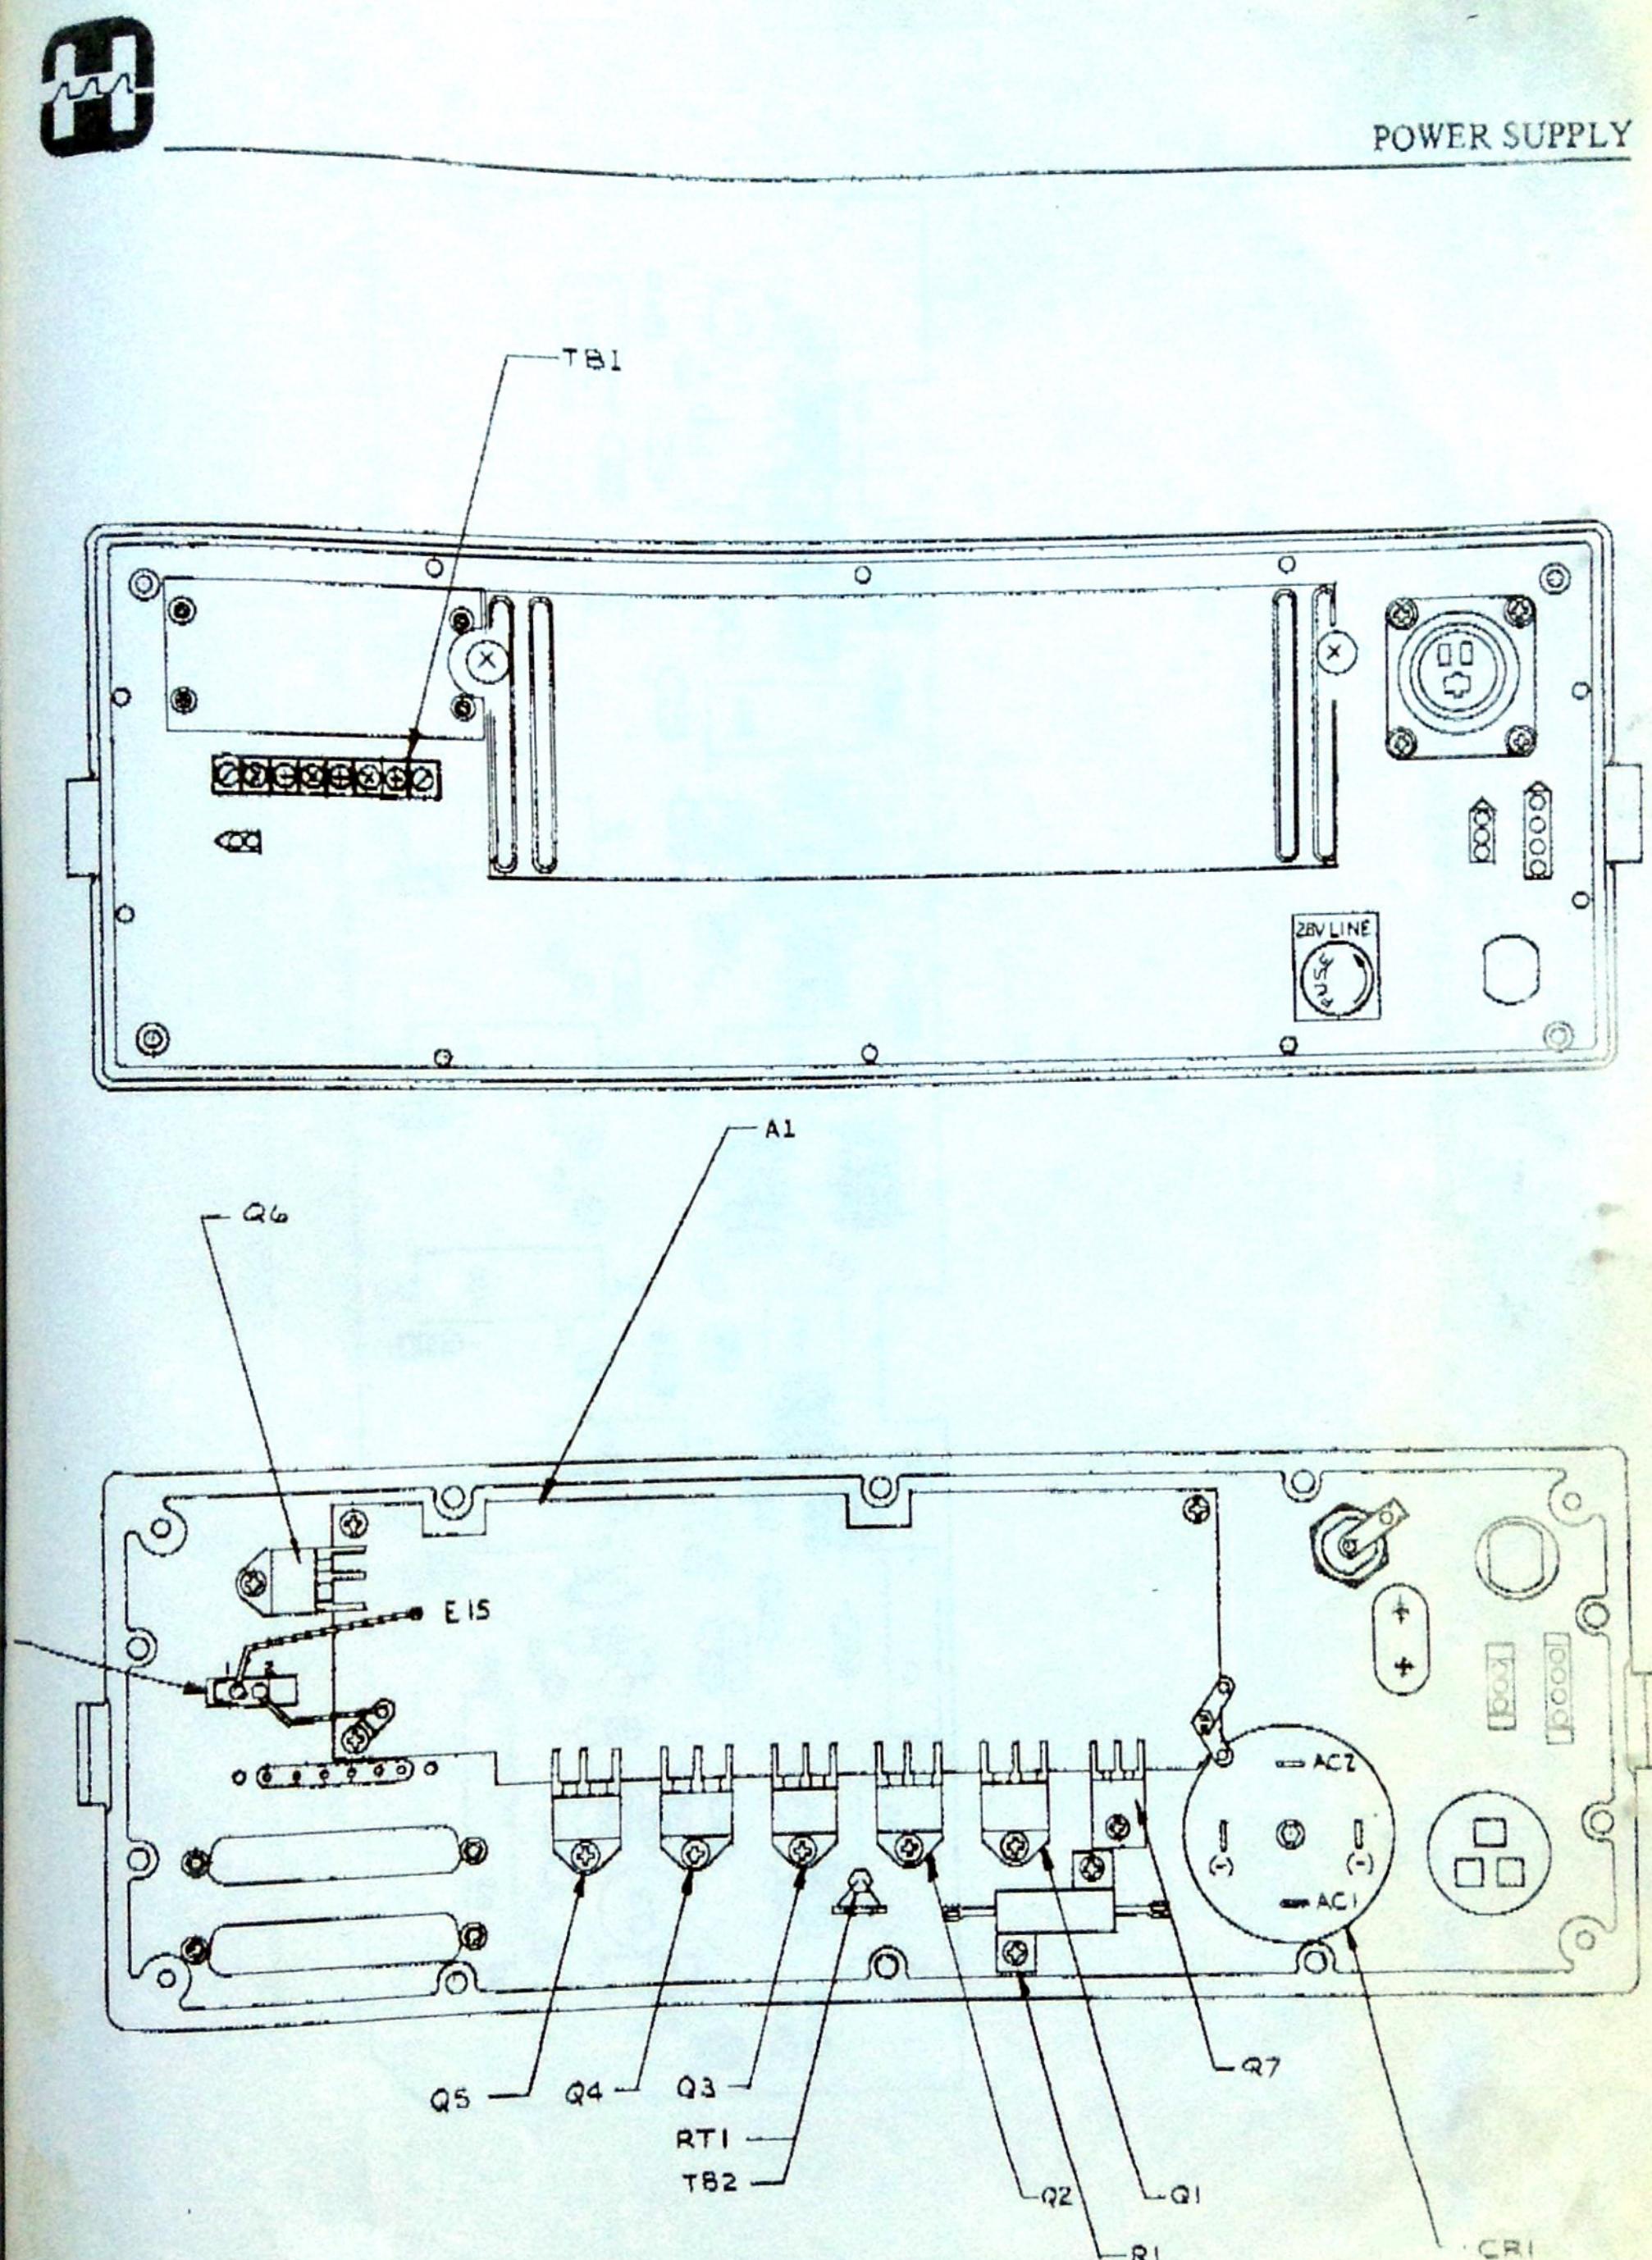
3A2 Rear Panel Assembly (6628-2300)
